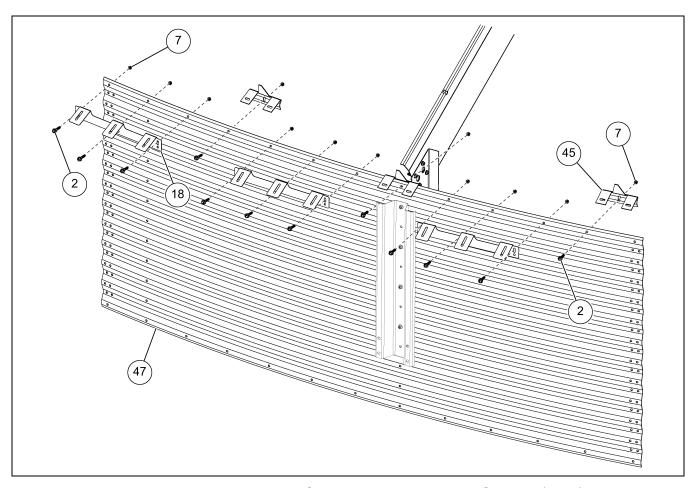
E Installing the Eave Clip and Eave Angle to the Sidewall (4.00")
